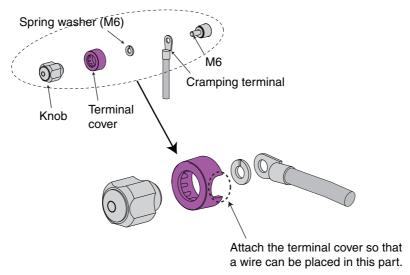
Details on connecting LOAD and SOURCE terminals
